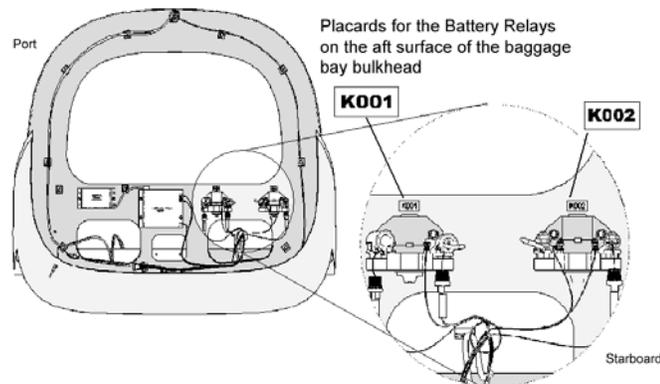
Aft side of the Baggage Bay Bulkhead showing the location and details of the relay placards
